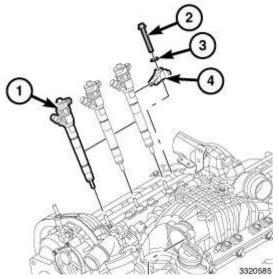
Fuel Injector, Hold Down Bolt, Washer & Retaining Claw Courtesy of CHRYSLER GROUP, LLC
